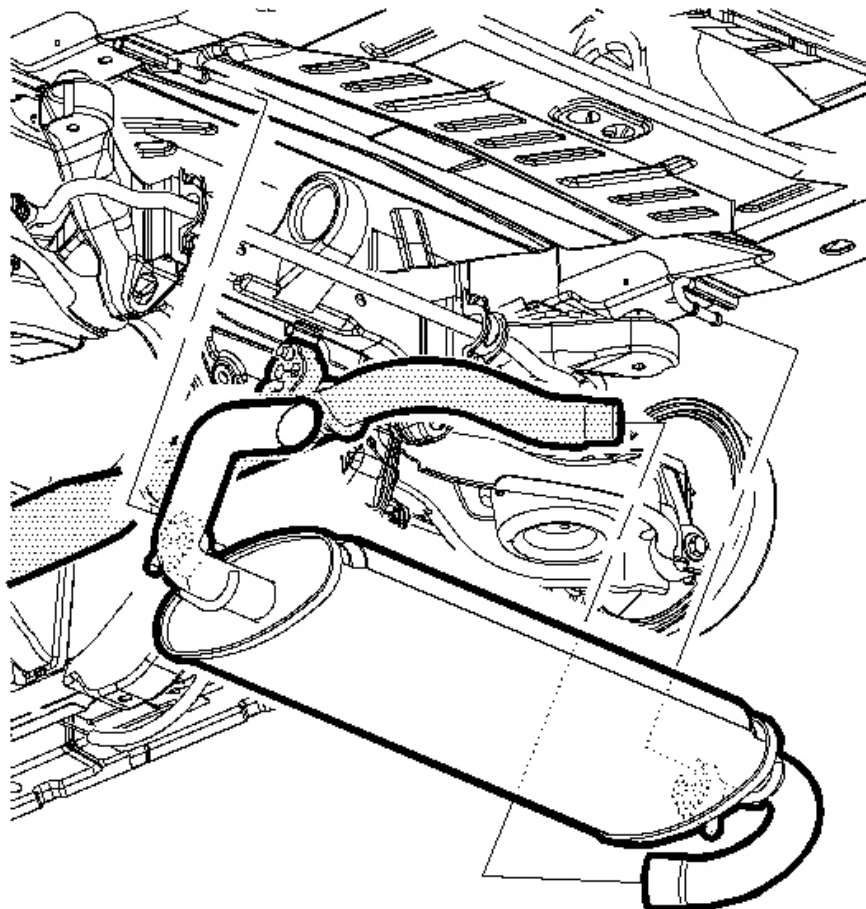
Positioning Service Muffler & Tailpipe Assembly
